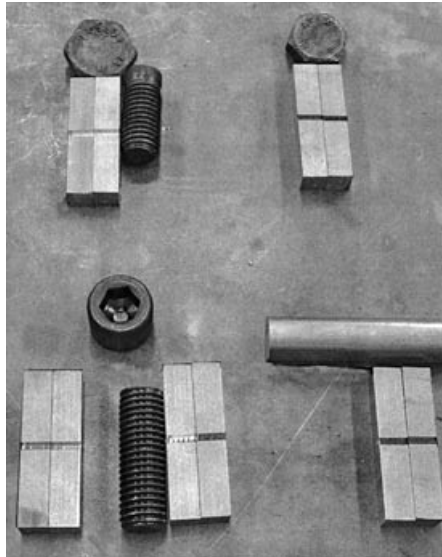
A selection of Charpy impact specimens derived from bolting materials. Clockwise from lower right: 1018 cold rolled for reference, A574 socket head cap screw as supplied and annealed, A325 structural steel fastener, 8.8 metric hex cap screw.
